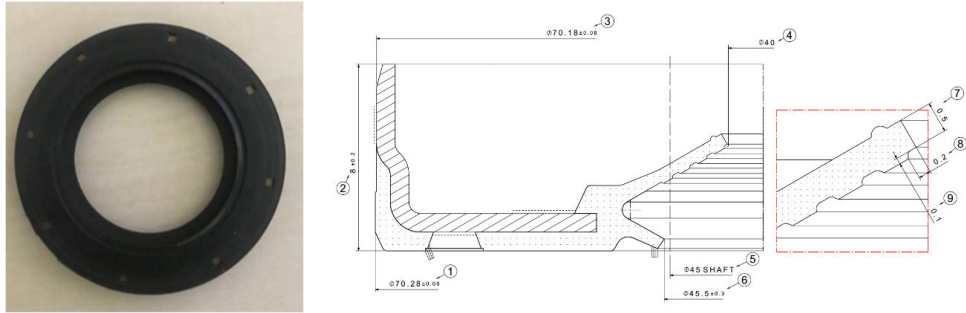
Prototype Manufacturing (a) Prototype Seal (b) Technical Drawing
